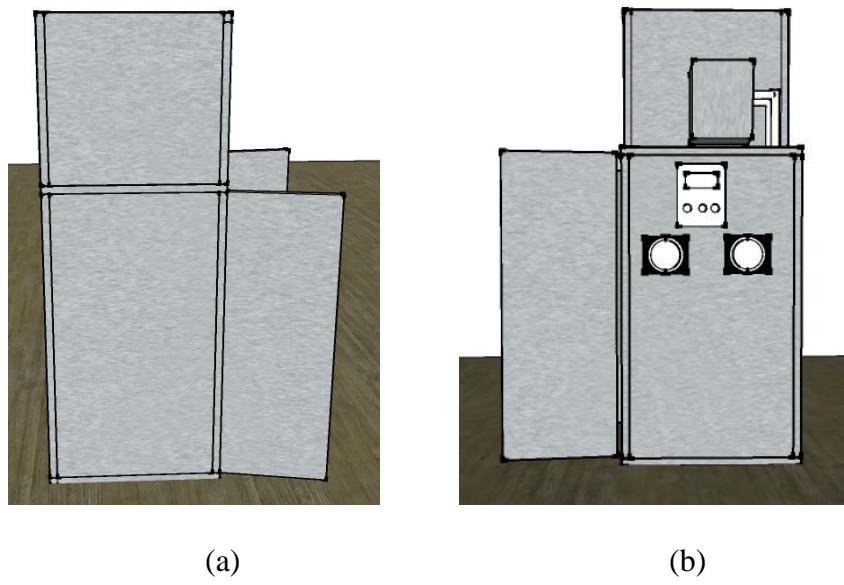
Hardware Design: (a) Outer Left-side and (b) Right-side view
